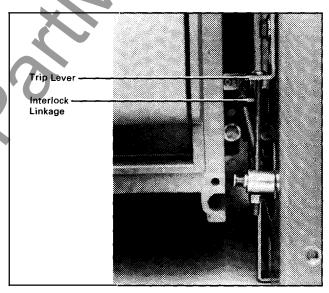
Improper Placement - Interlock Linkage Below Trip Lever (Front View with Dead Front Cover Removed)
